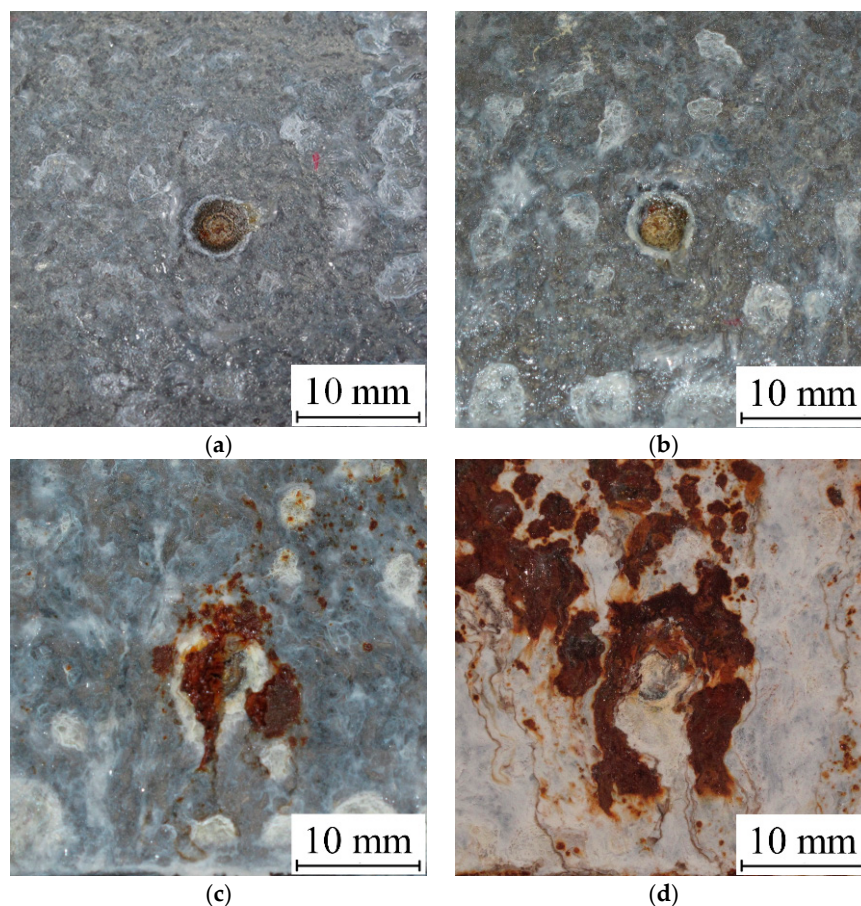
State of corrosion on the external surfaces of the spot welds during the salt spray corrosion test after the following exposure times: (a) 24 h, (b) 48 h, (c) 168 h, and (d) 500 h. Images obtained from a sample welded with run no. 4.
